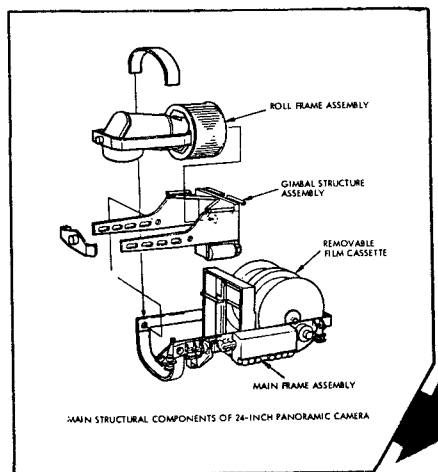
SIM Bay 24-Inch Panoramic Camera Assembly
